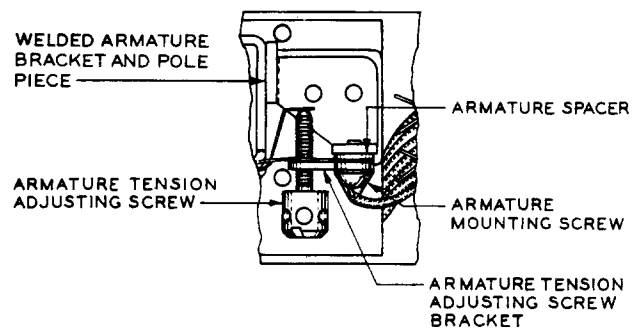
A - 267-TYPE AND D-175787 RELAYS EQUIPPED WITH WELDED ARMATURE BRACKET AND POLE PIECE.
